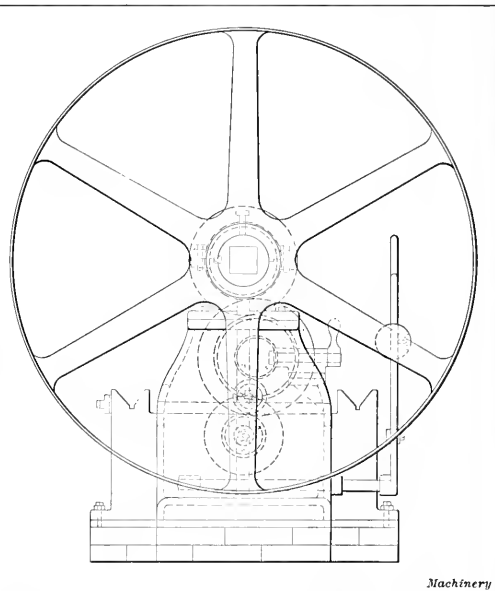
End View of Lobdell Roll Grinding Machine showing Driving Gear for Roll and Carriage
